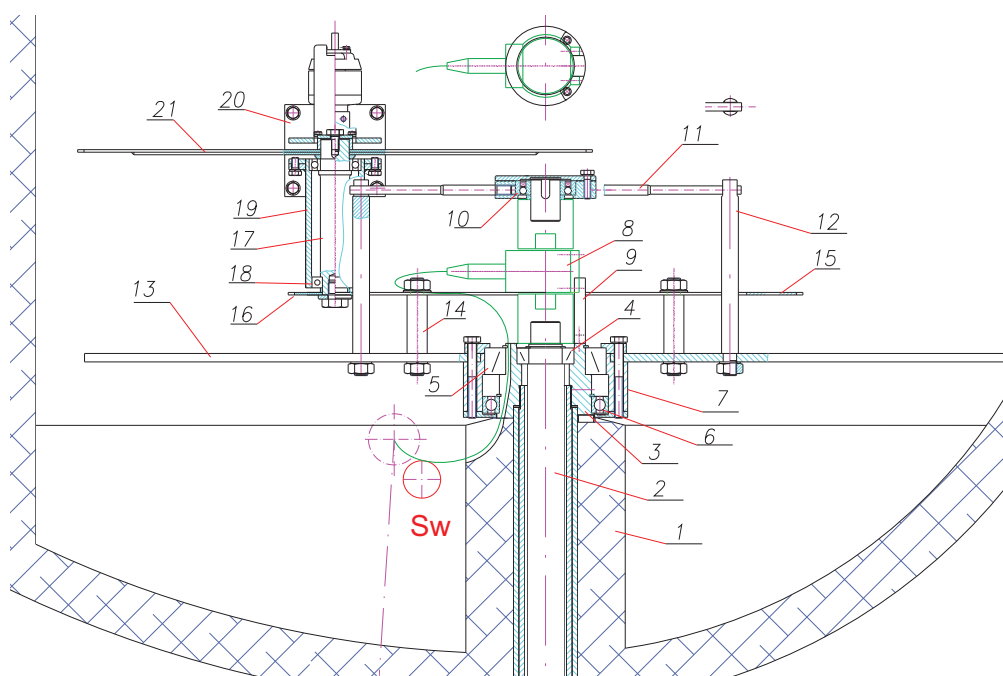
Power transmission from the turbine shaft to the generator. Nomenclature: 1 – buoy hull, 2 – turbine shaft, 3 – head of column, 4, 5 – tapered roller bearings, 6 – roll bearing, 7 – hub of flywheel, 8 – torque meter, 9 – bracket, 10 – unidirectional clutch, 11 – casing of the clutch with two horizontal rods, 12 – vertical rods, 13 – flywheel, 14 – bolts, 15, 16 – 1st stage chain pulley, 17 – upper shaft journal, 18 – roll bearing, 19 – sleeve, 20 – transmission casing, 21 – 2nd stage chain pulley transmitting power to located above generator
